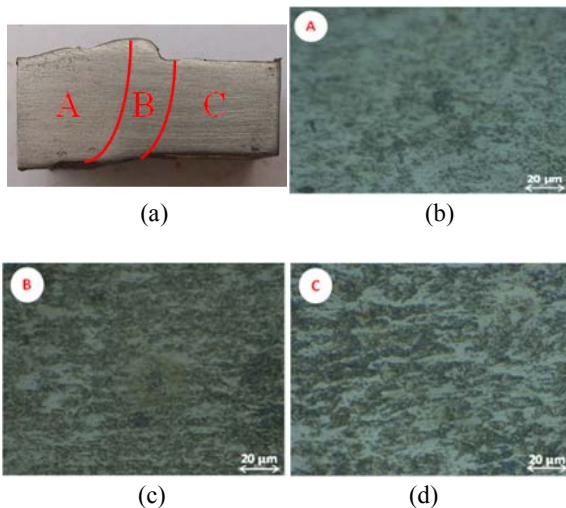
(a) Specimen for micro-photograph of welded joint using E6013 electrode (b) micro-structure of weld metal (c) micro-structure of HAZ (d) micro-structure of base metal.
